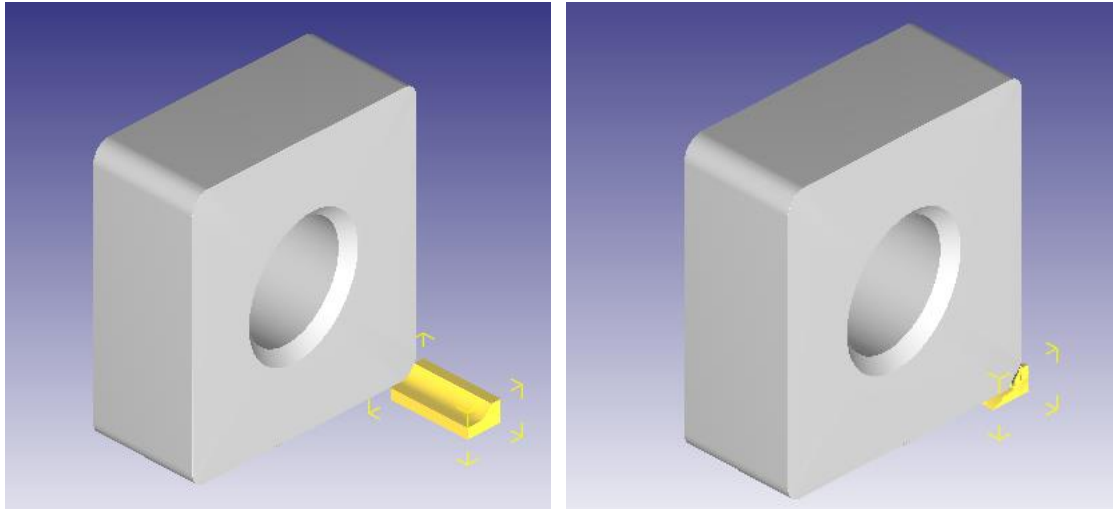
simulation set up of work piece and cutting tool at the starting and ending points of machining operation
